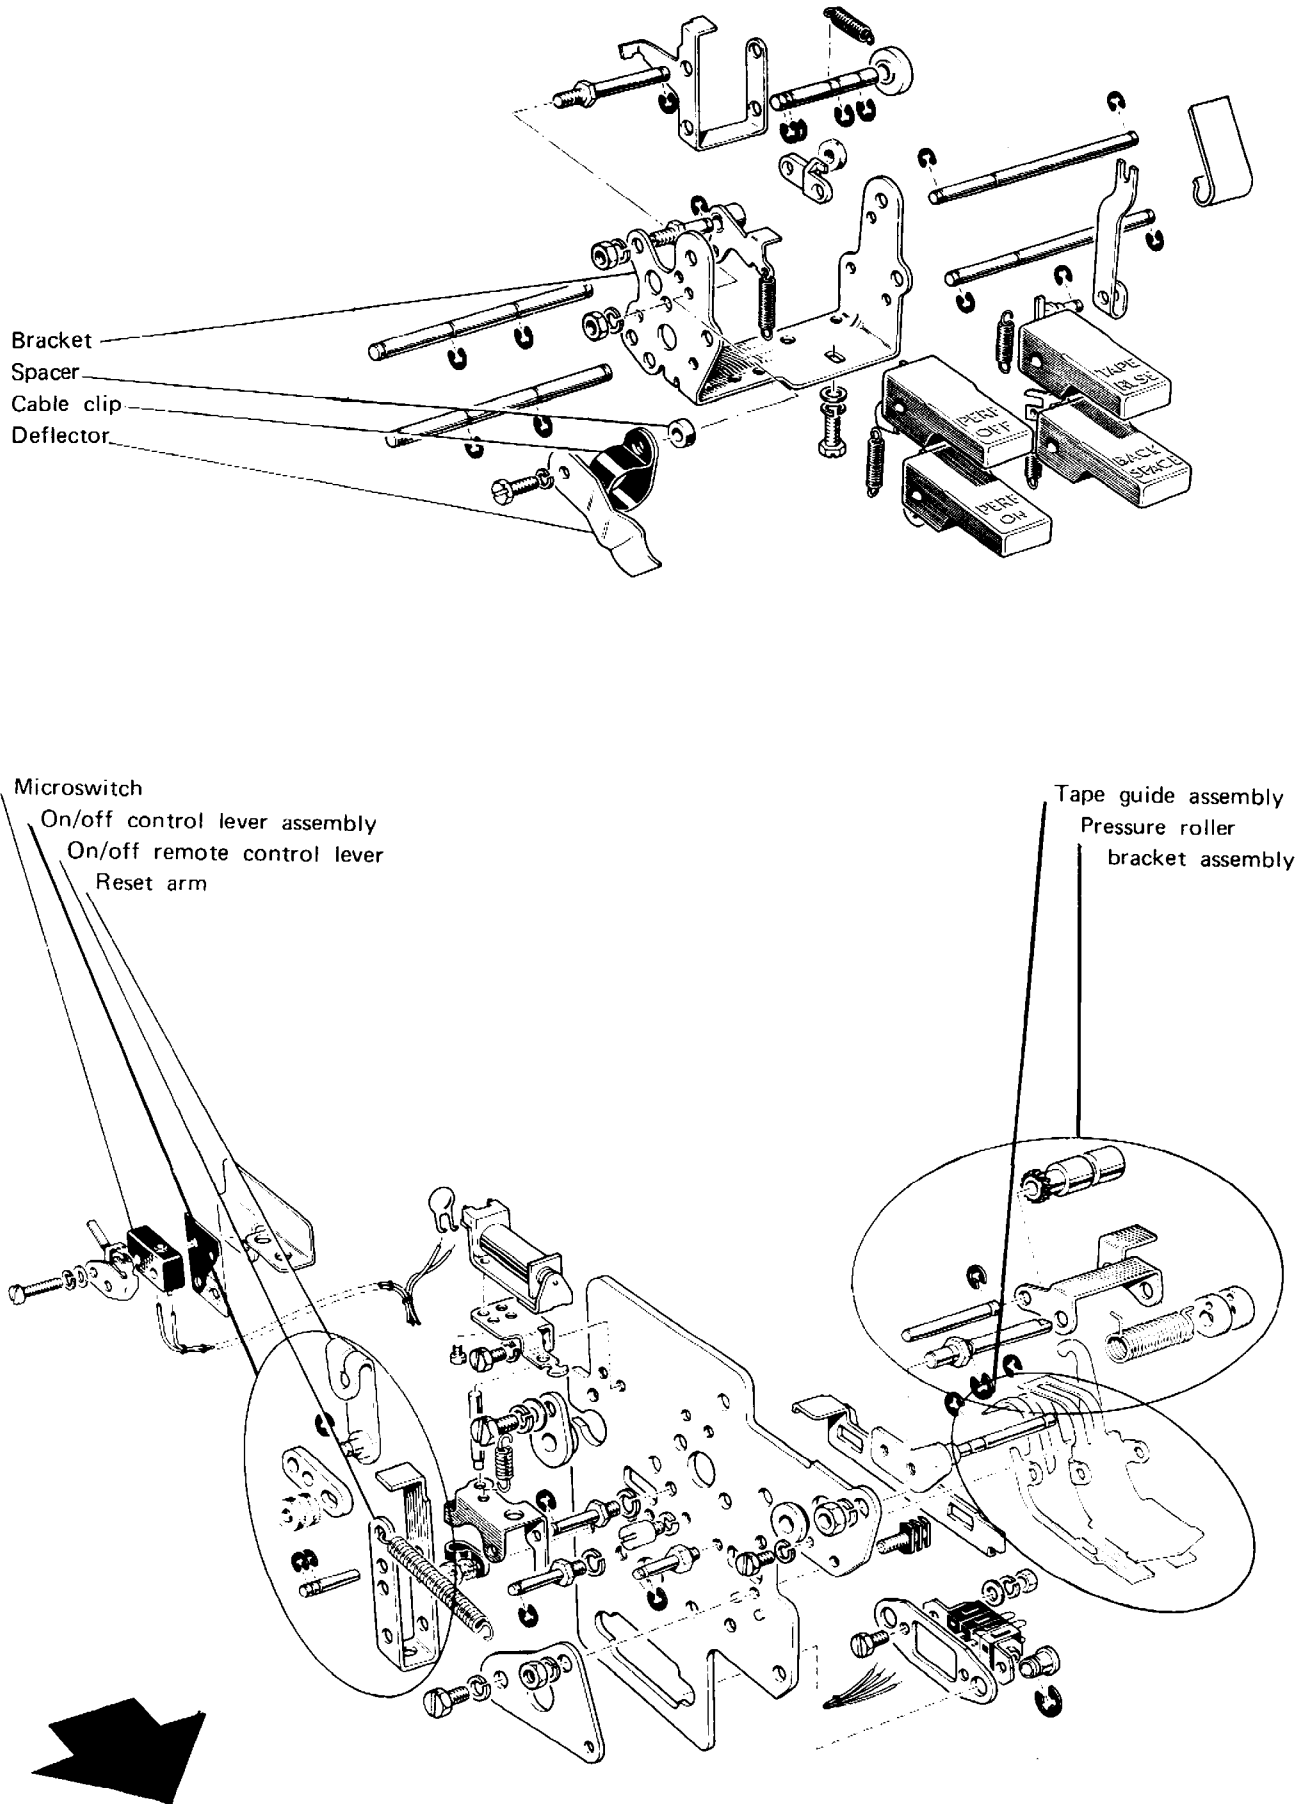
TAPE PUNCH UNIT BUTTON AND COVER PLATE ASSEMBLIES
